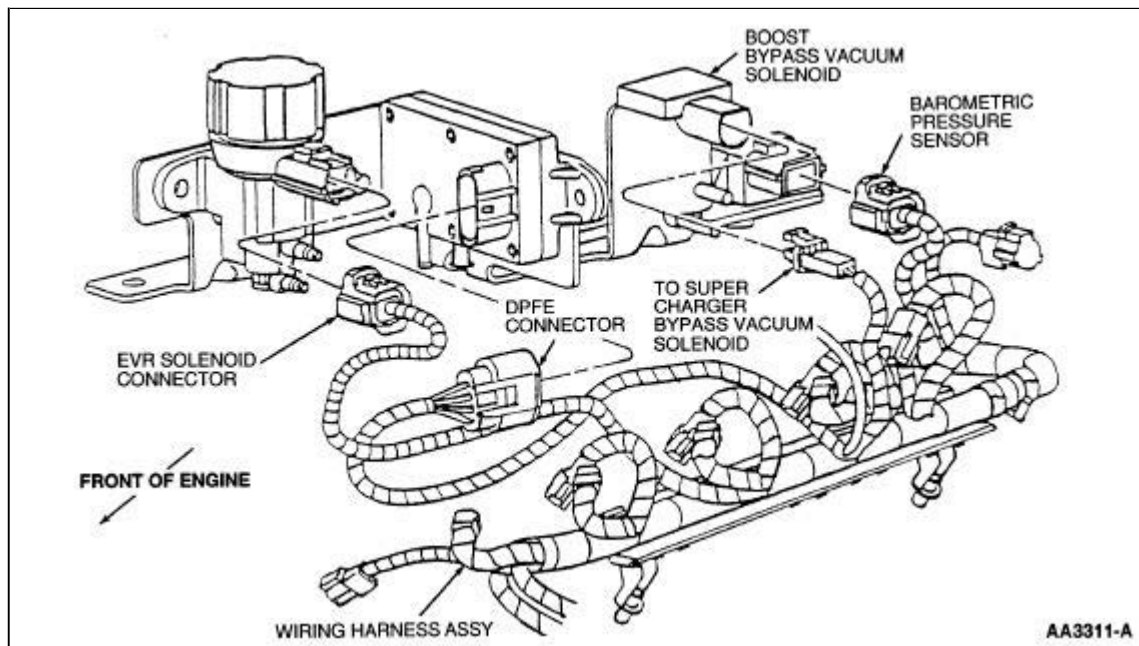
5.4L Lightning Supercharger Controls—Wiring Harness Assembly
